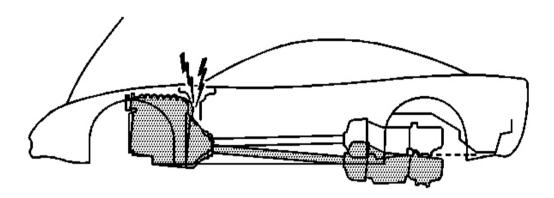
Rear Of Driveline, Rear Of Transaxle Assembly & Rear Of Engine Courtesy of GENERAL MOTORS CORP.
